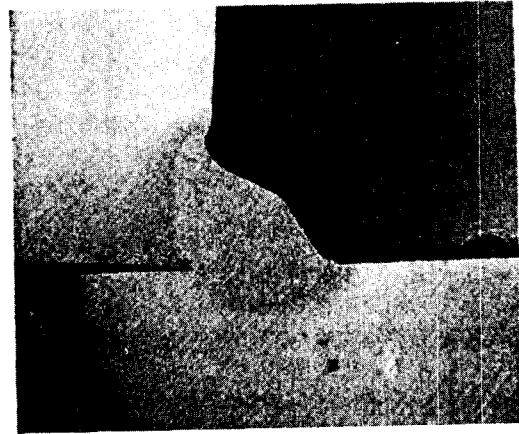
(b) Photograph of weld bead with undercut (welding speed=8 (mm/sec), src voltage=26 (V), welding current=240 (A))
